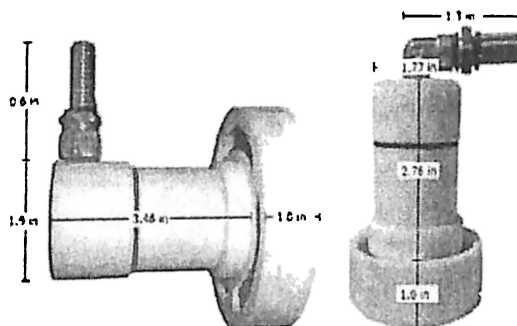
Motor Thrusters Assembly (left) for vertical movement and (right) for horizontal movement
